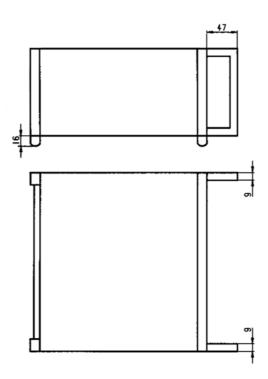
Dimensions of the handles on the E-536 housing, in mm
